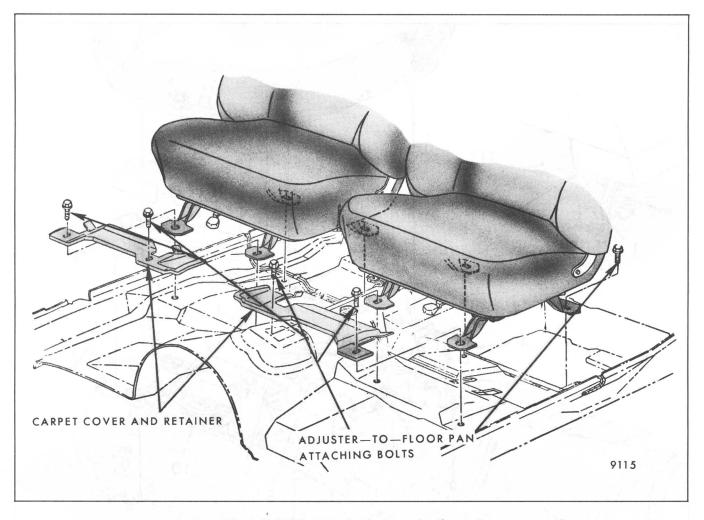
"F" Body Bucket Seats - and Adjusters
